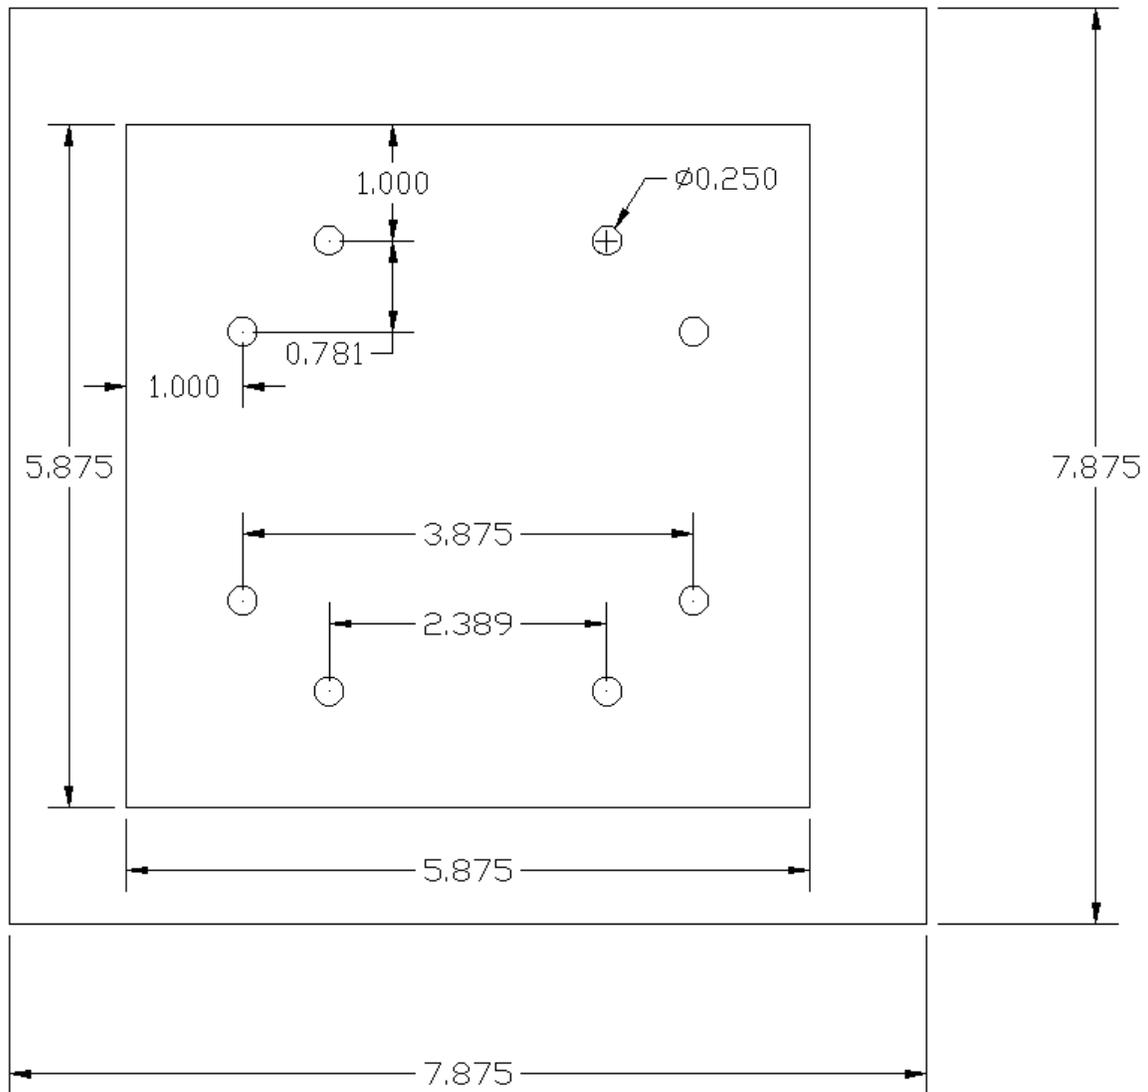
Payload 08 Modified HASP-Provided Mounting Plate
